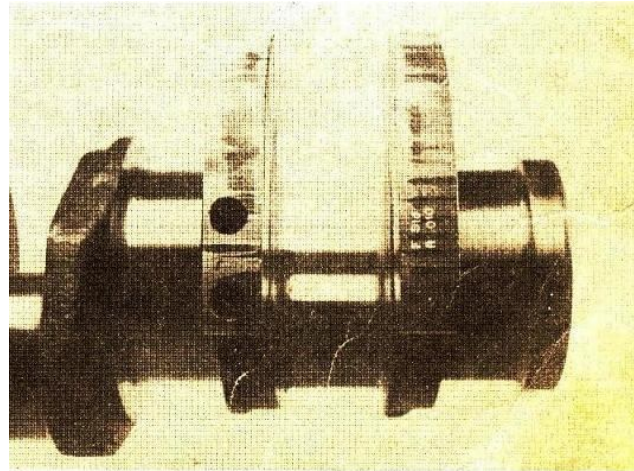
Oversize thrust bearing mark on the crankshaft
